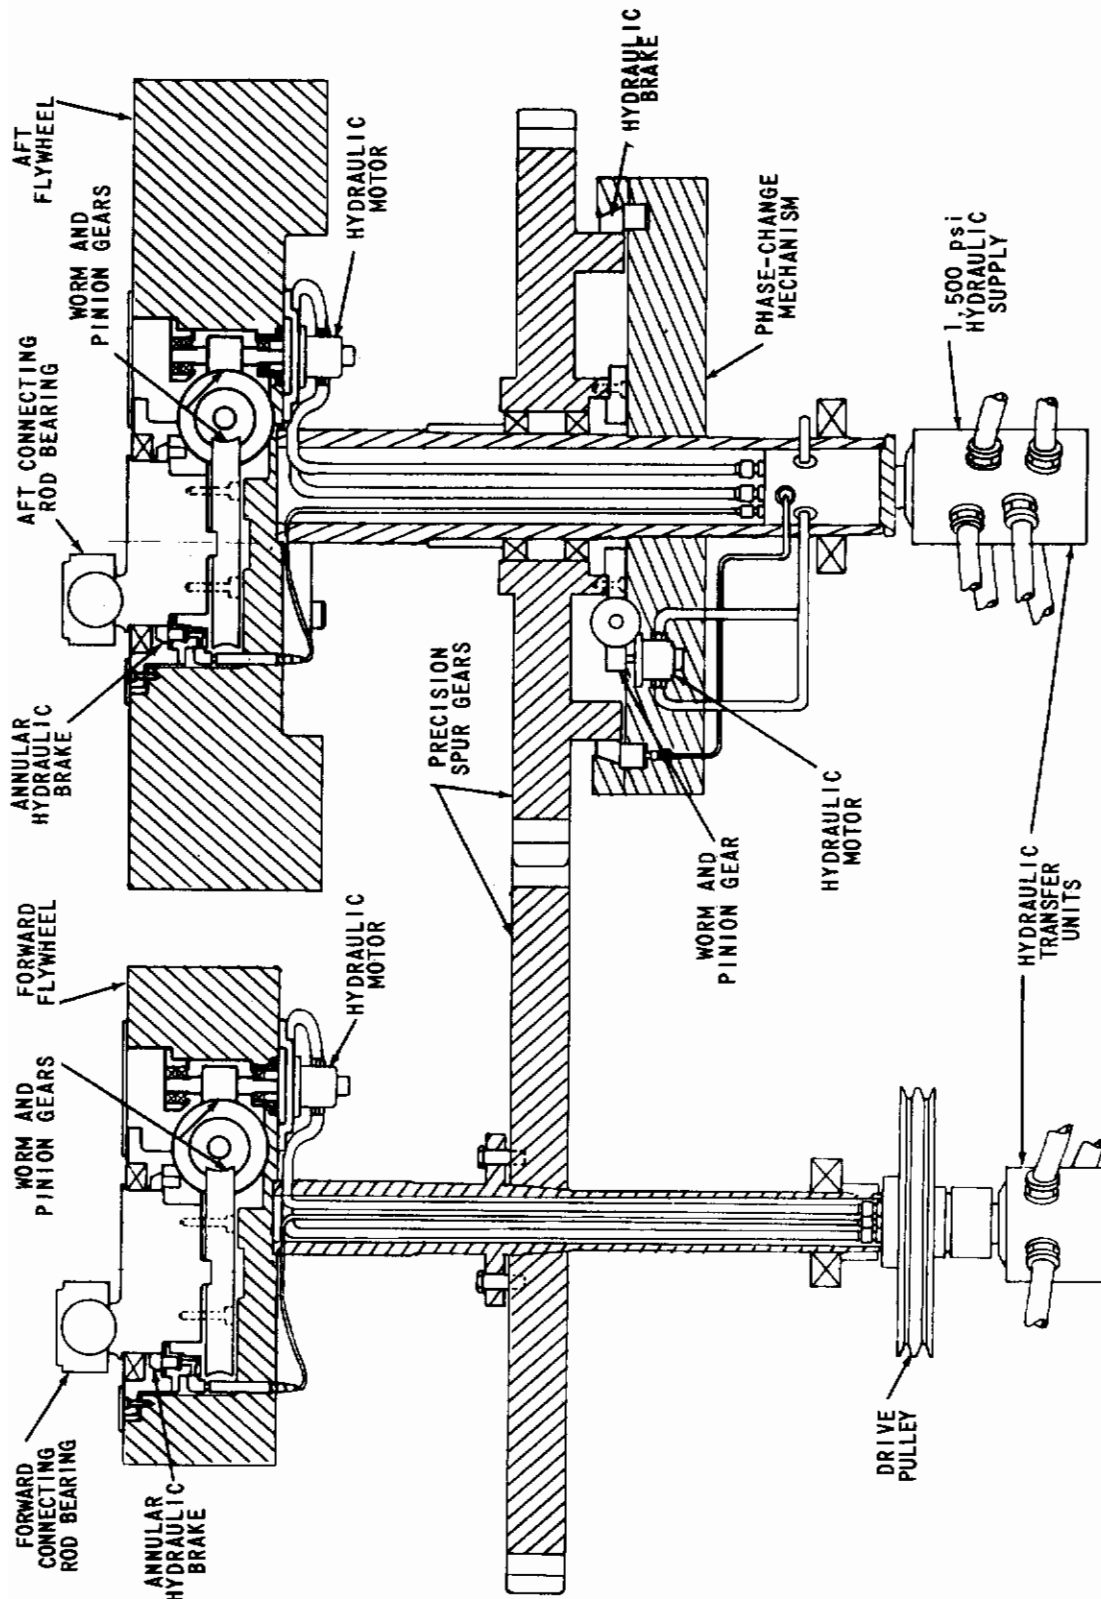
THE MECHANICAL OSCILLATOR DRIVE AND MOTION-CHANGE MECHANISM
